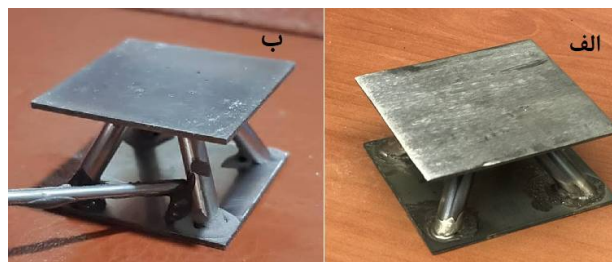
a) Specimen after brazing b) Placing the paste at the joint
